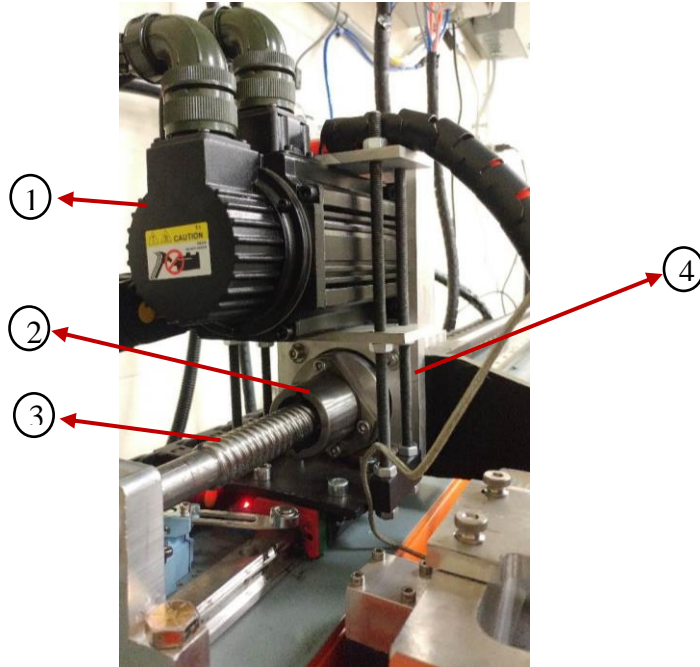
Trailing side of the ball screw assembly. 1) The servo motor 2) the ball nut 3) the ball screw 4) the aluminum support plates
